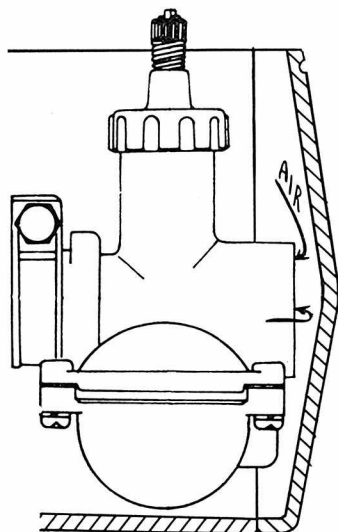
It may be necessary to modify carburetor covers or space covers out to prevent restriction of air to carburetor.
